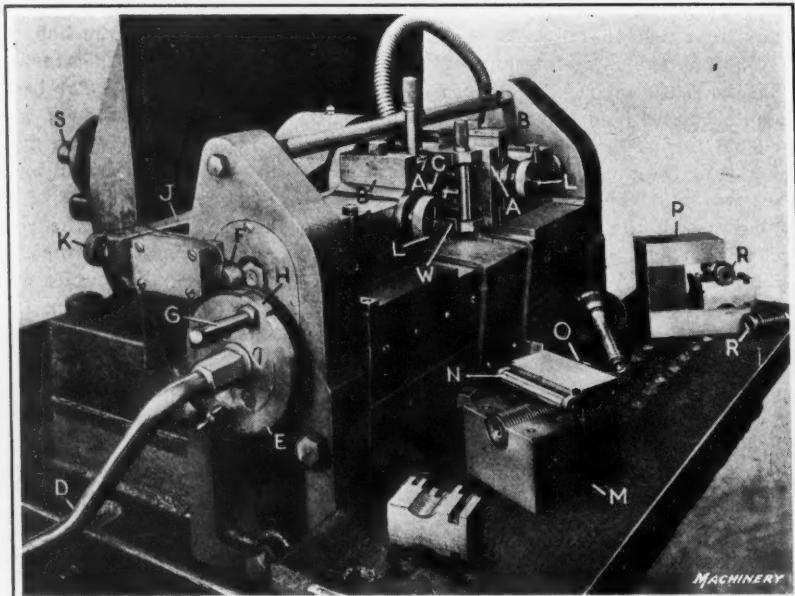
Single-purpose Jaw Hobbing Machine with Two Dovetailed Work-heads
